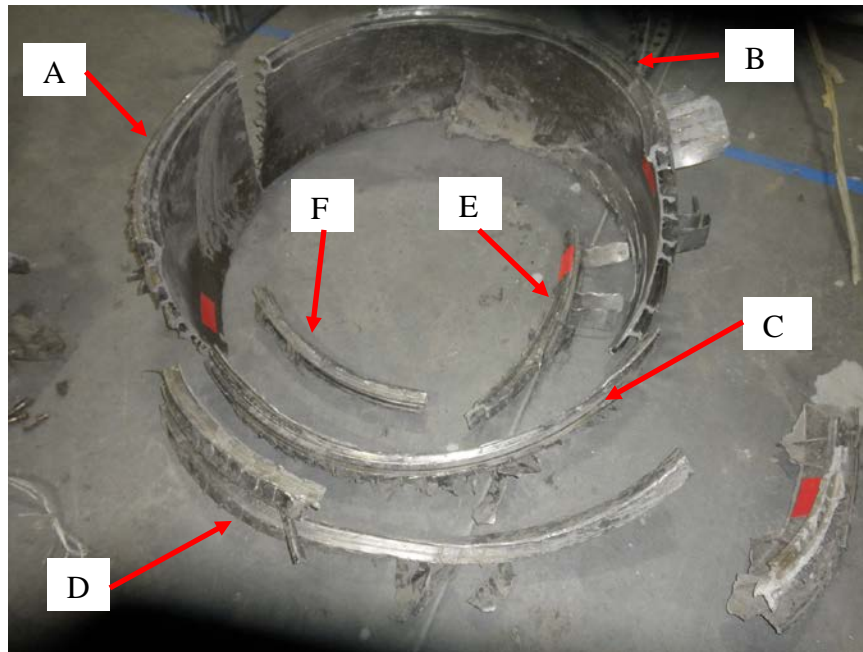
The pieces of the No. 2 engine's booster spool.
